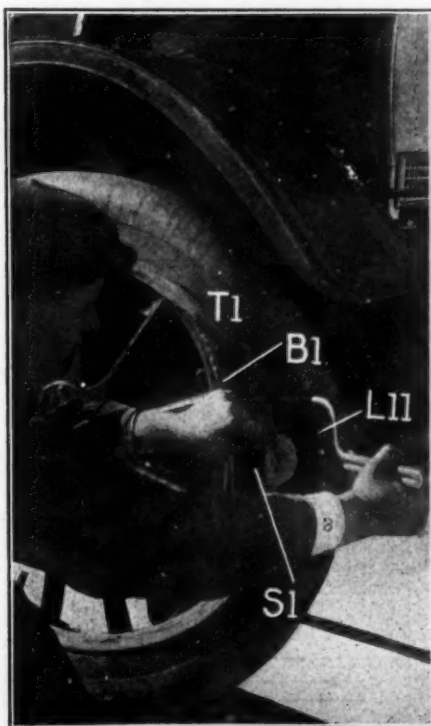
Correct method of inserting security bolts and valves with a forked lever
